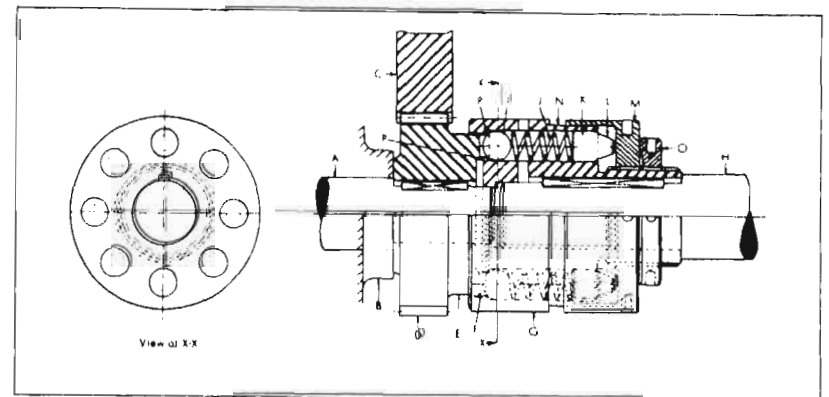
Contained balls *I* are pressed by spring *J* into notches in a flange of gear *D*. Tension is adjusted by rotating nut *M* which shifts part *K*.
